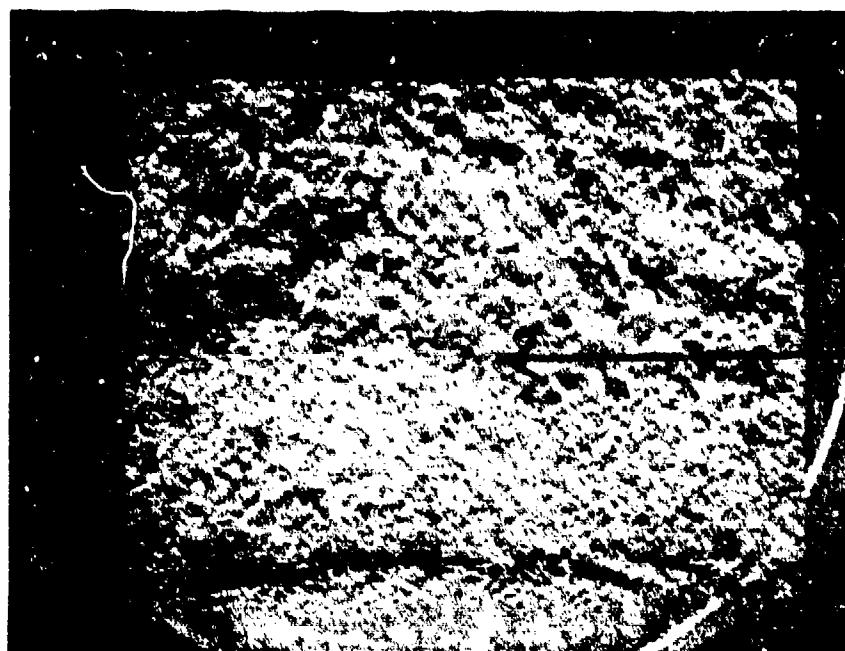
Fracture surface of an A-516 Charpy specimen tested at -196°C , 11x.
